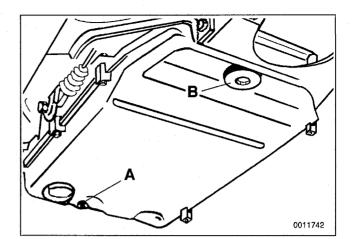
ATF drain plug (A) and fill plug (B) on A5S 310Z transmission.
